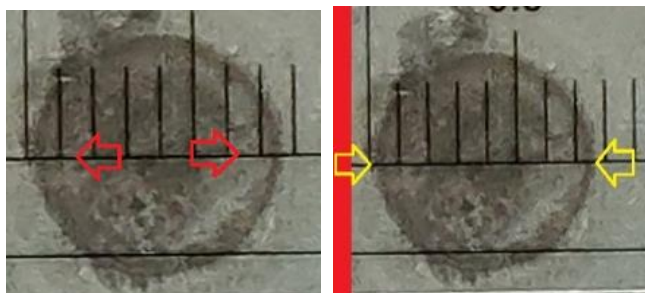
Weld outer diameter including HAZ (left) and weld core center diameter (right).
